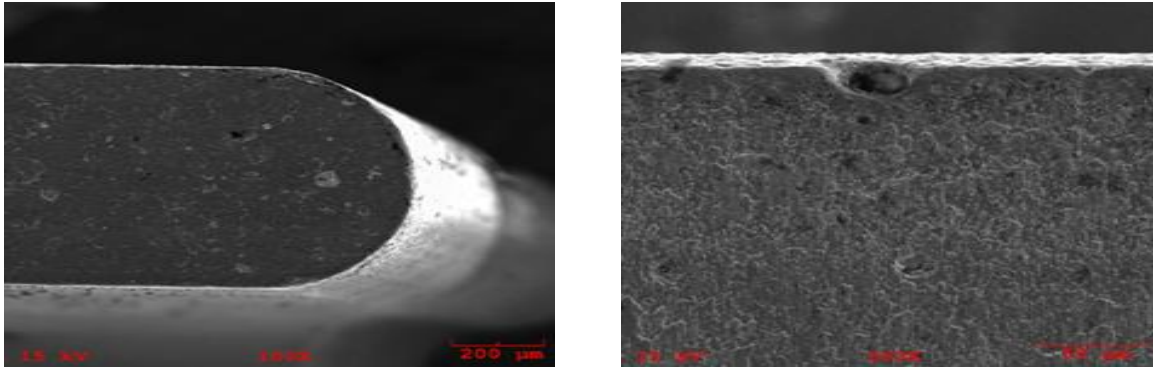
Edge surface wear and flank wear of TiN coated channelled D2 tool steel punch
